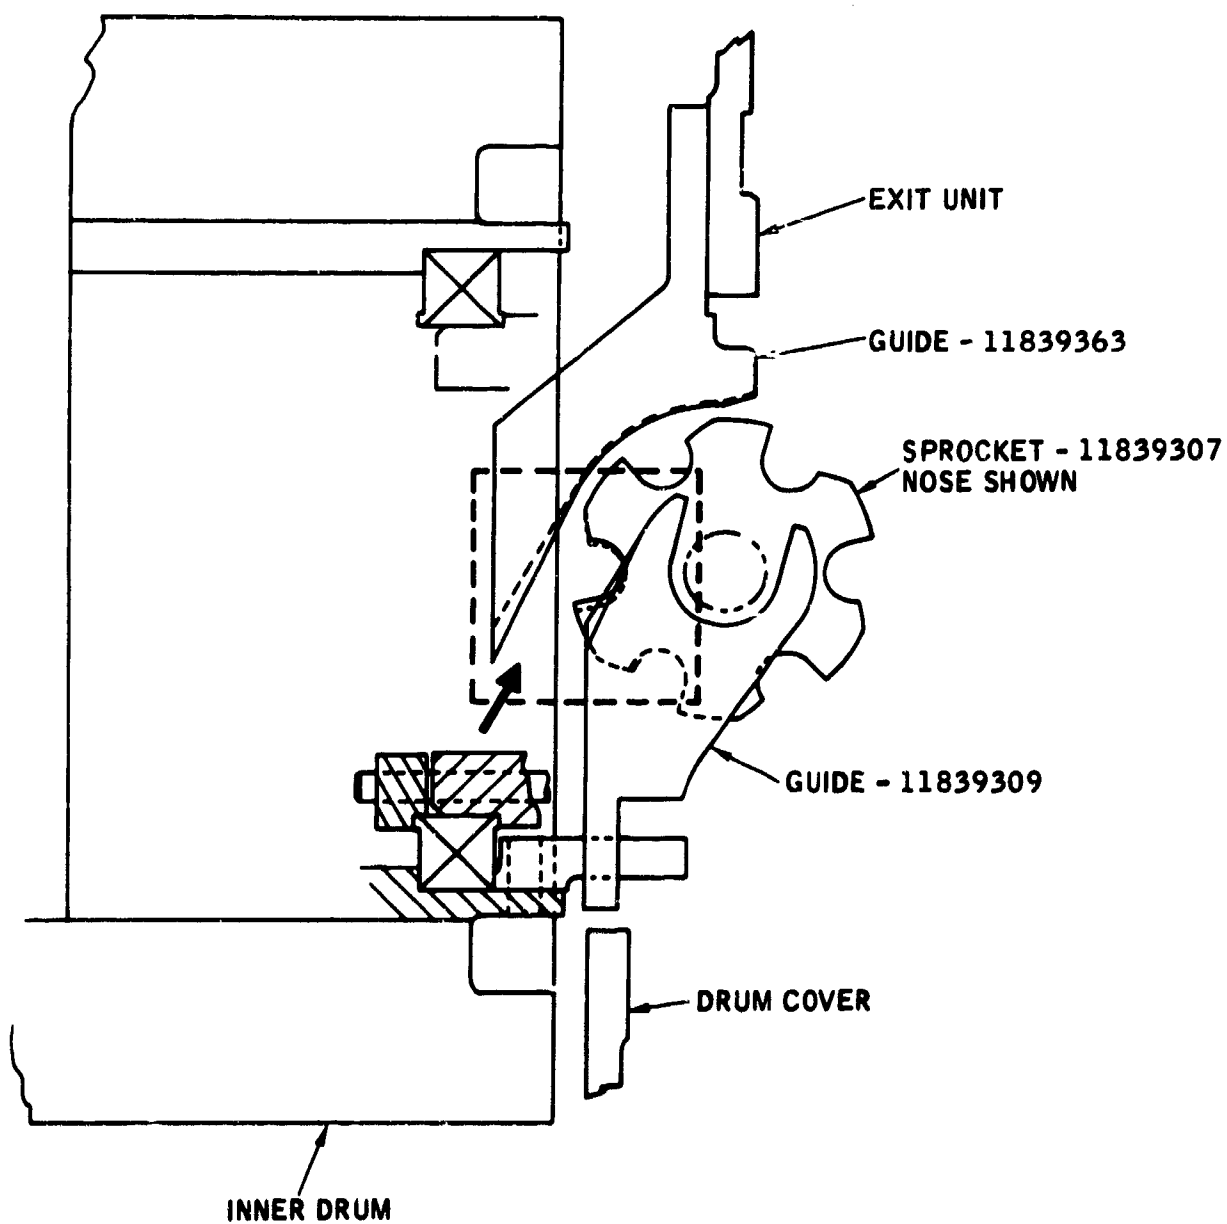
(Sheet 2 of 2) Design Study of Inner Drum
